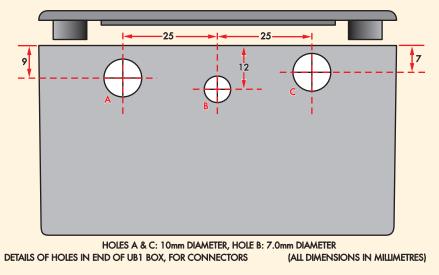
this diagram shows the drilling details for the right-hand side panel.
